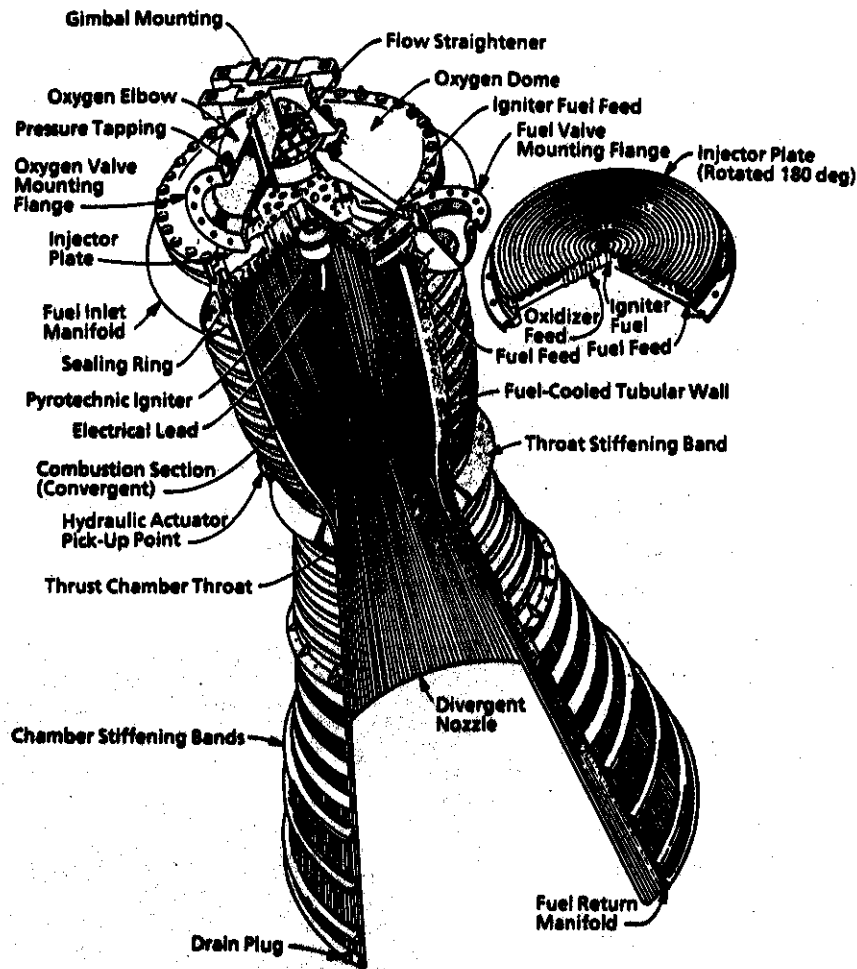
Construction of a regeneratively cooled tubular combustion chamber assembly.
